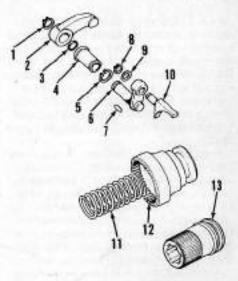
Exploded view of differential lock component parts. Note pedal and linkage arrangement varies from model to model.
